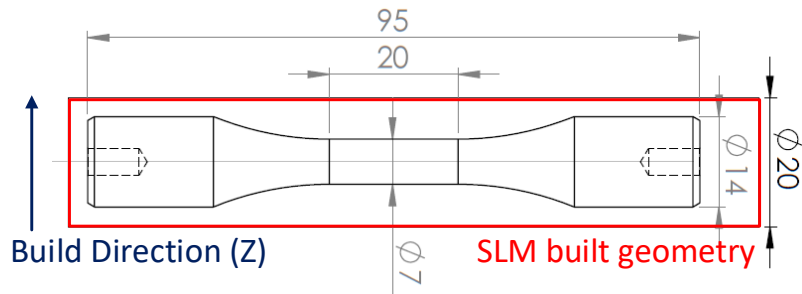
Cylindrical fatigue sample dimensions with the as-built geometry, (dimensions are in mm).
